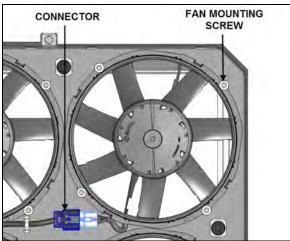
CONNECTOR & MOUNTING SCREW LOCATION
